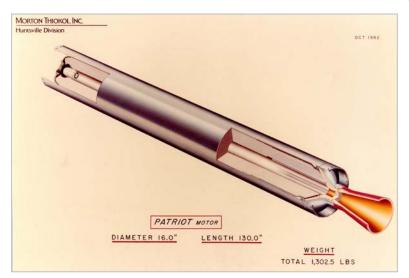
Cutaway Diagram of TX-486 Patriot motor.
